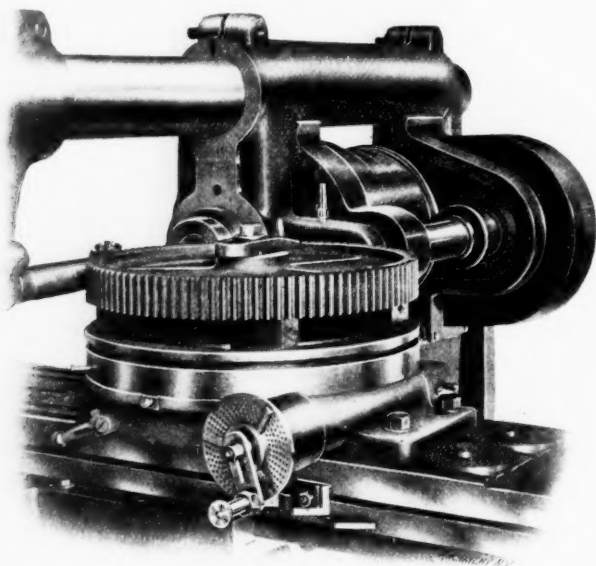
Circular Milling Attachment with Indexing Arrangement, used for Cutting Large Spur Gears.
